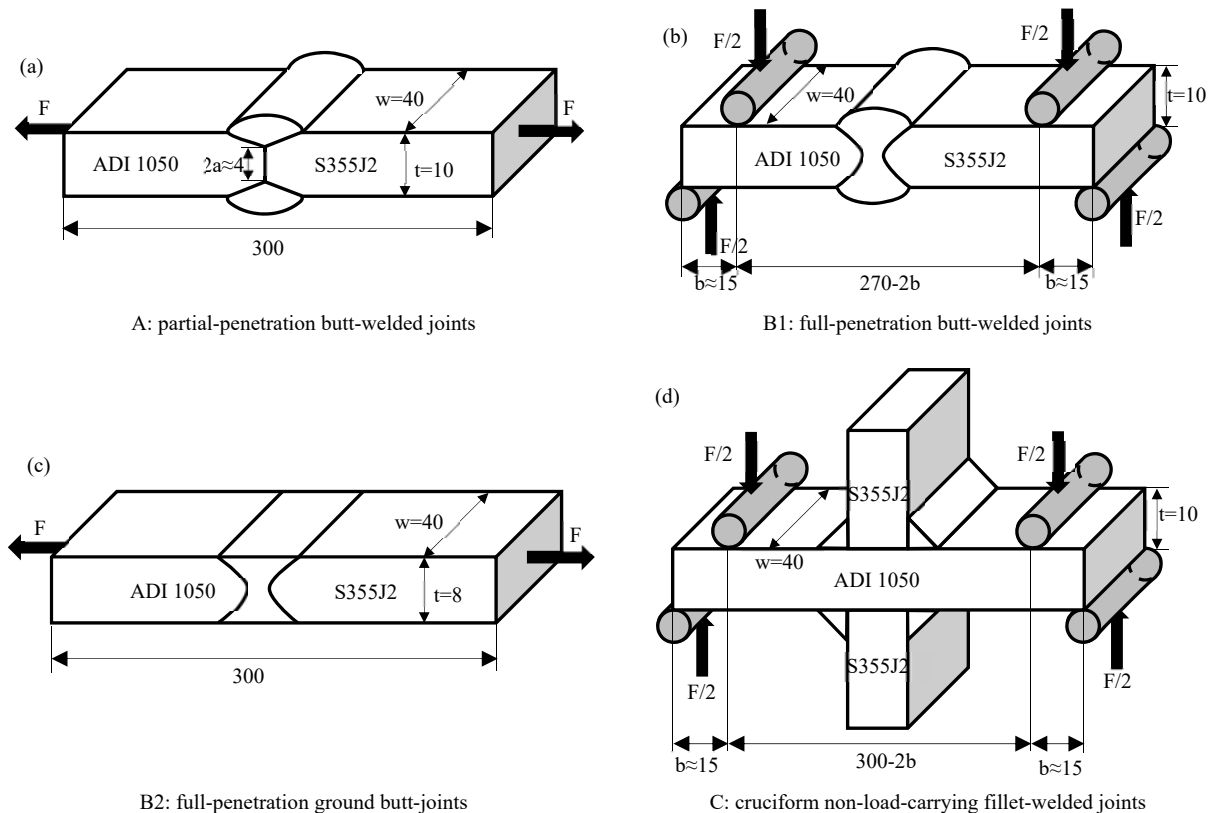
Geometries and loading conditions of dissimilar welded joints tested under fatigue loading.
